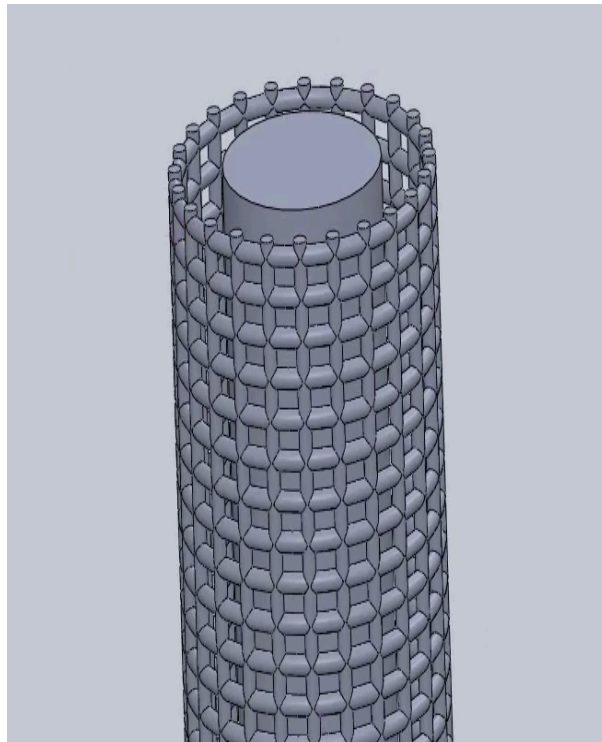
SolidWorks image of mesh cylinder designed via helical approach inner cylinder diameter is 6.35 mm.
